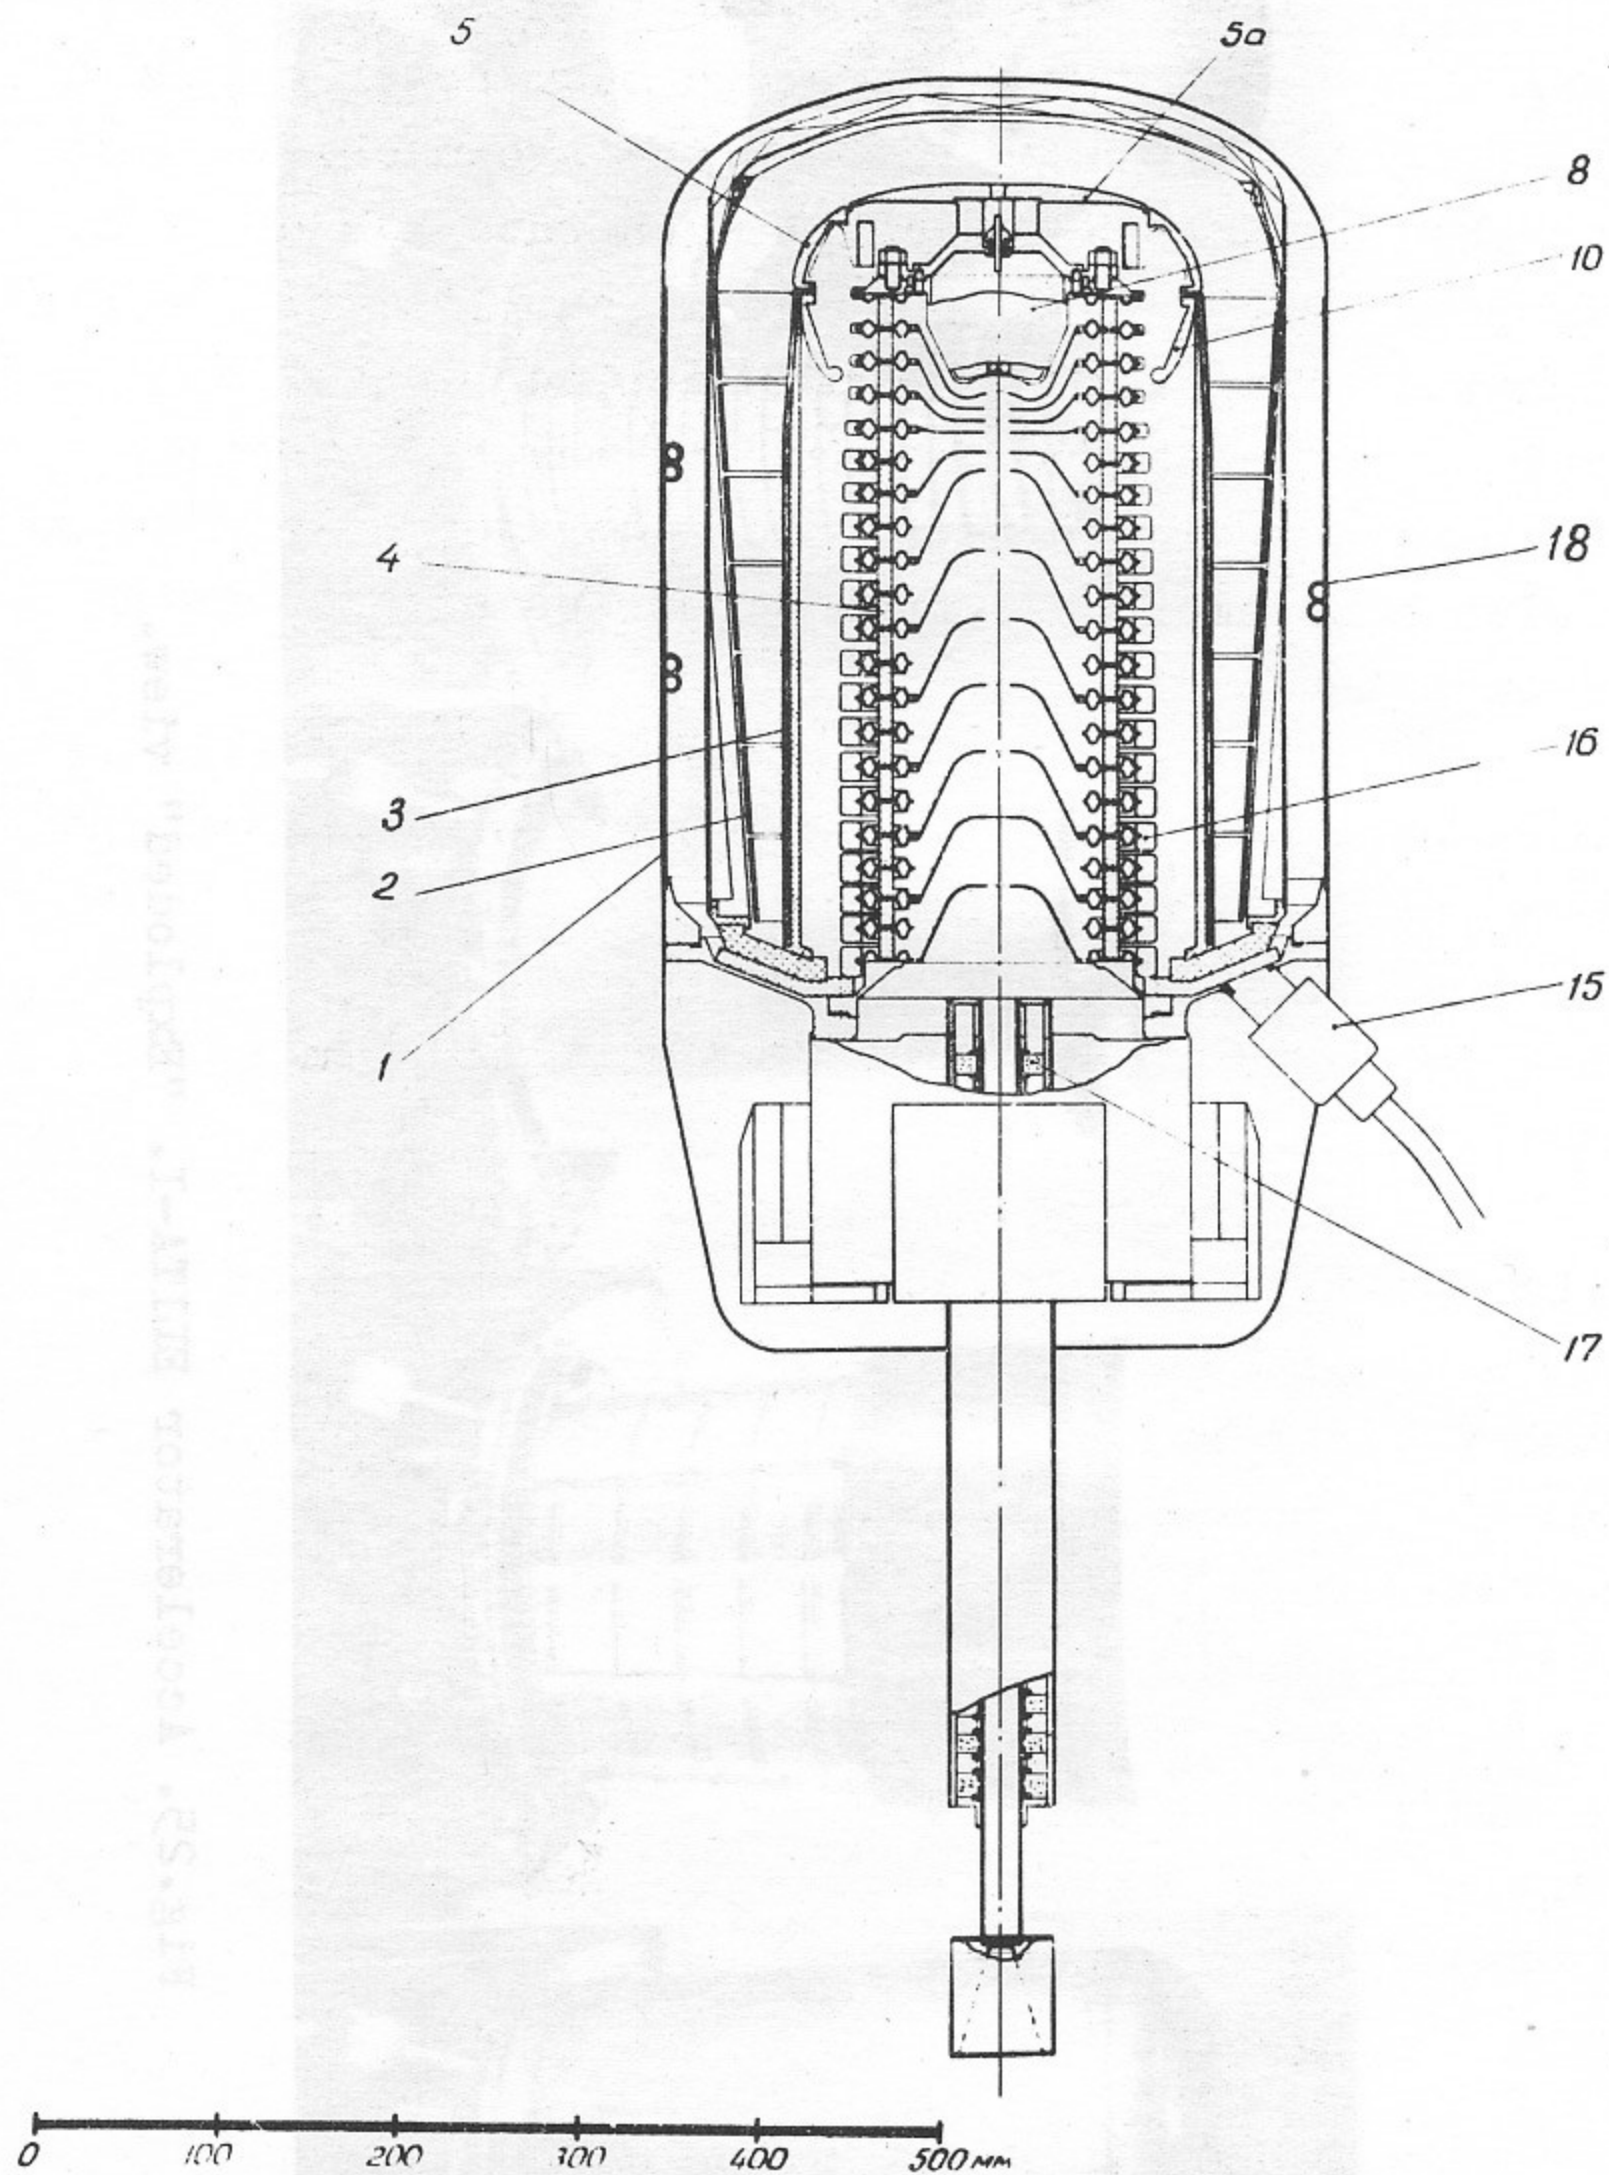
Design of ELITA-1. Legend for parts on p.53.
